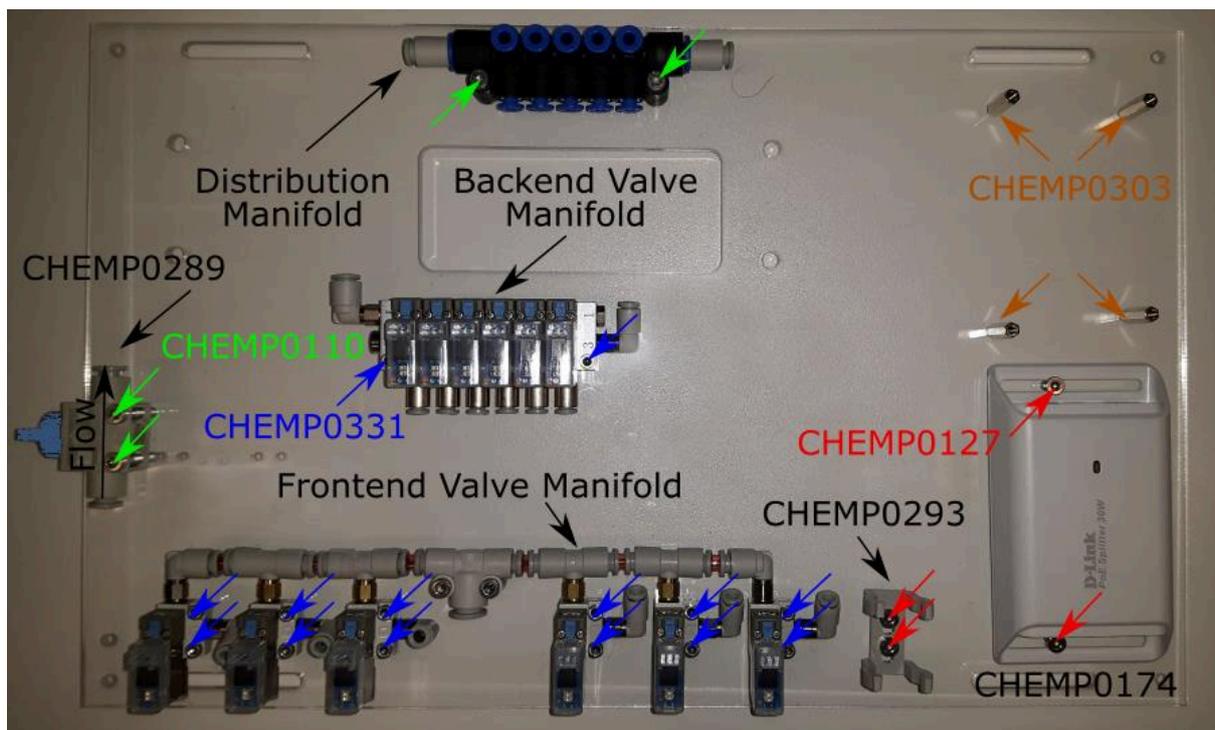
The previously assembled backend and frontend valve manifolds were mounted on the back panel along with other parts as shown.
